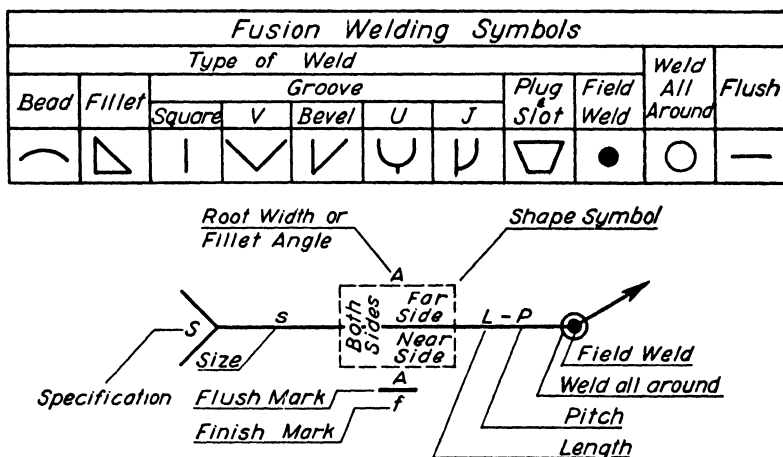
WELD SYMBOLS — AMERICAN WELDING SOCIETY.
